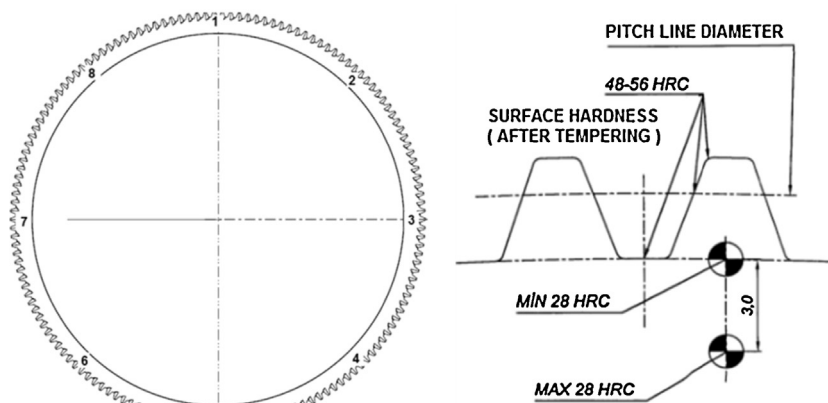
Hardness specification on part drawing and measurement points on starter ring gear.
